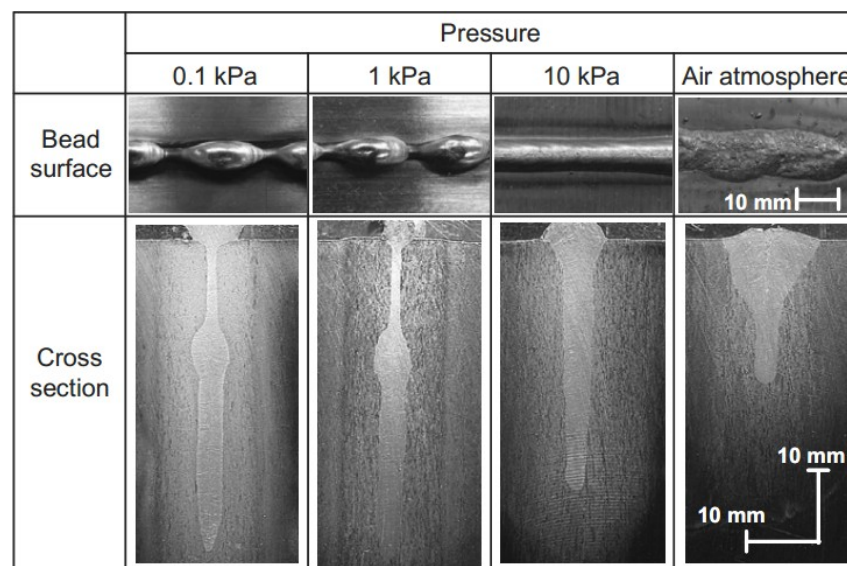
Bead surfaces and cross sections of disk laser welds in SUS304 stainless steel plate at different speeds under various pressures [118].
